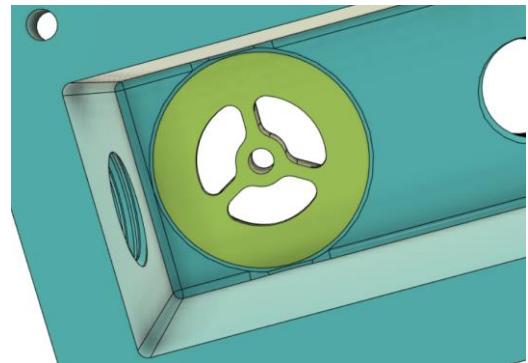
Exhaust Valve Gate glued to the Outlet Body
